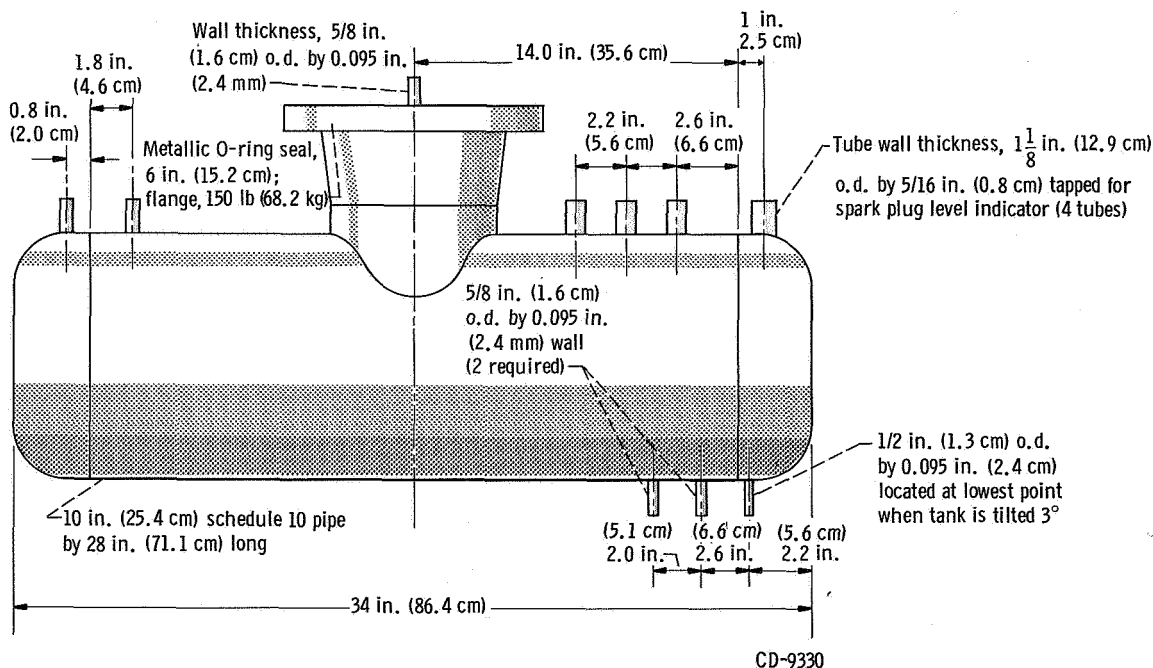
NaK expansion tank. All joints and tubes are inert arc welded. All material AISI 316 stainless steel.
